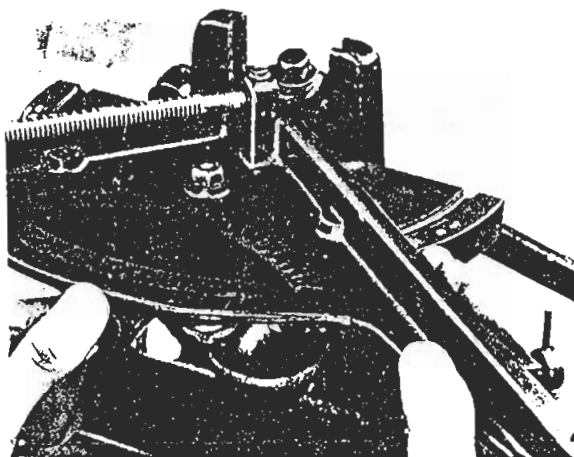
B. Changing Work Holder Position on a Spring Equipped Machine
